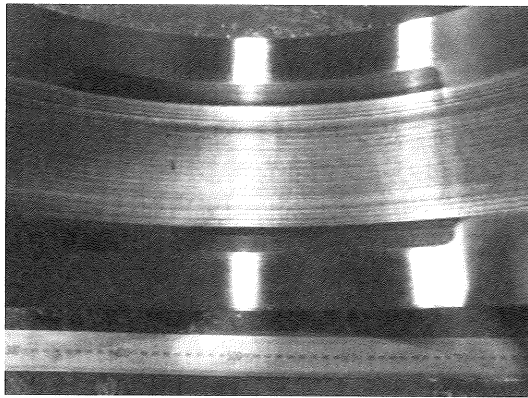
Appearance of weld bead on inner surface of φ700 diameter test pipe
